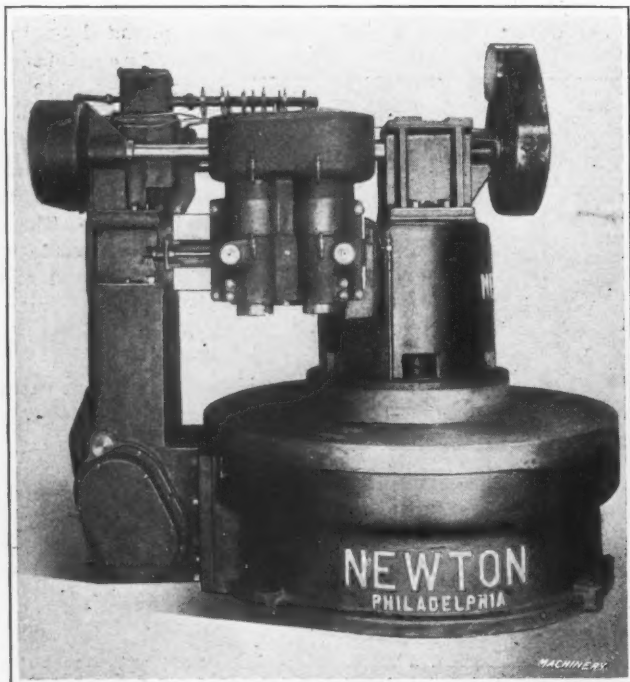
Continuous Rotary Milling Machine built by the Newton Machine Tool Works, Inc.
